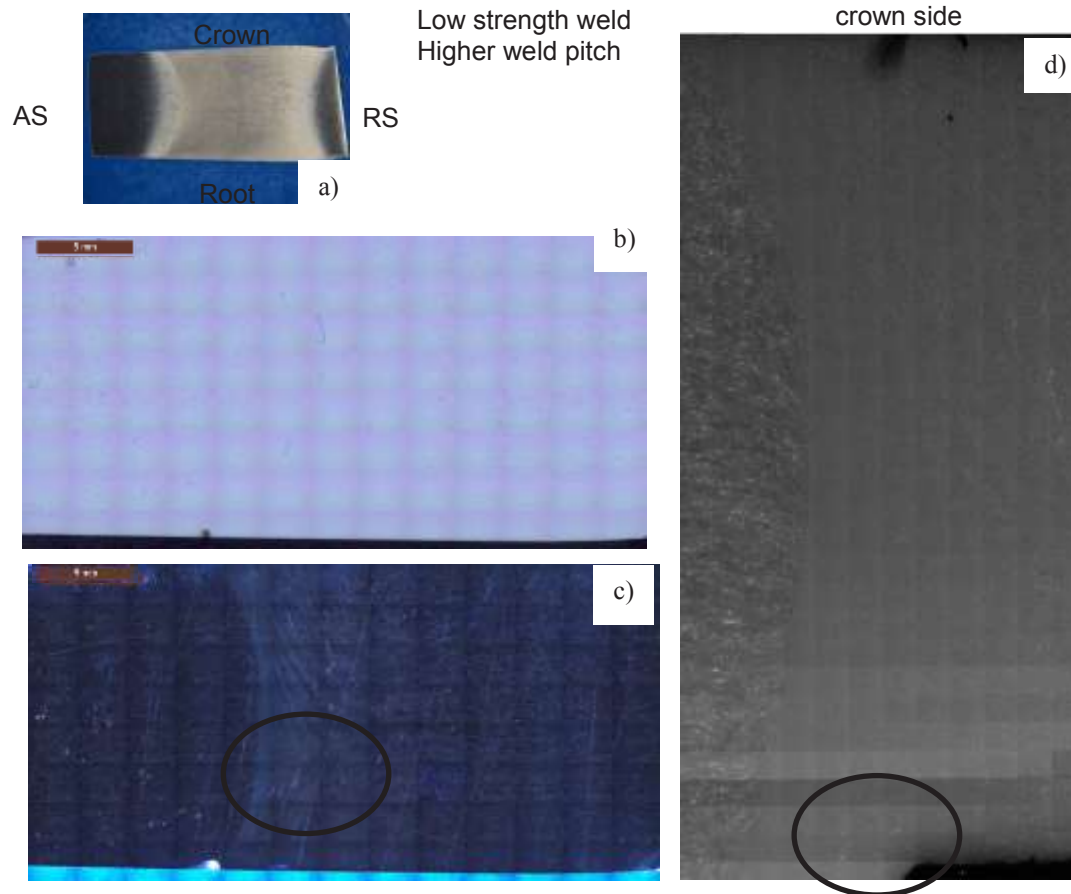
Optical images of the unetched metallographic of specimen 650-P10. This specimen was welded at the higher weld pitch and displayed the lowest UTS and ductility. An overall photograph of the transverse section of the weld is shown (a). Montages were made of the specimen using bright field (b) and dark field (c). Identified regions (shown in circle on (c)) were imaged in the SEM and a montage is shown of this region (d).
